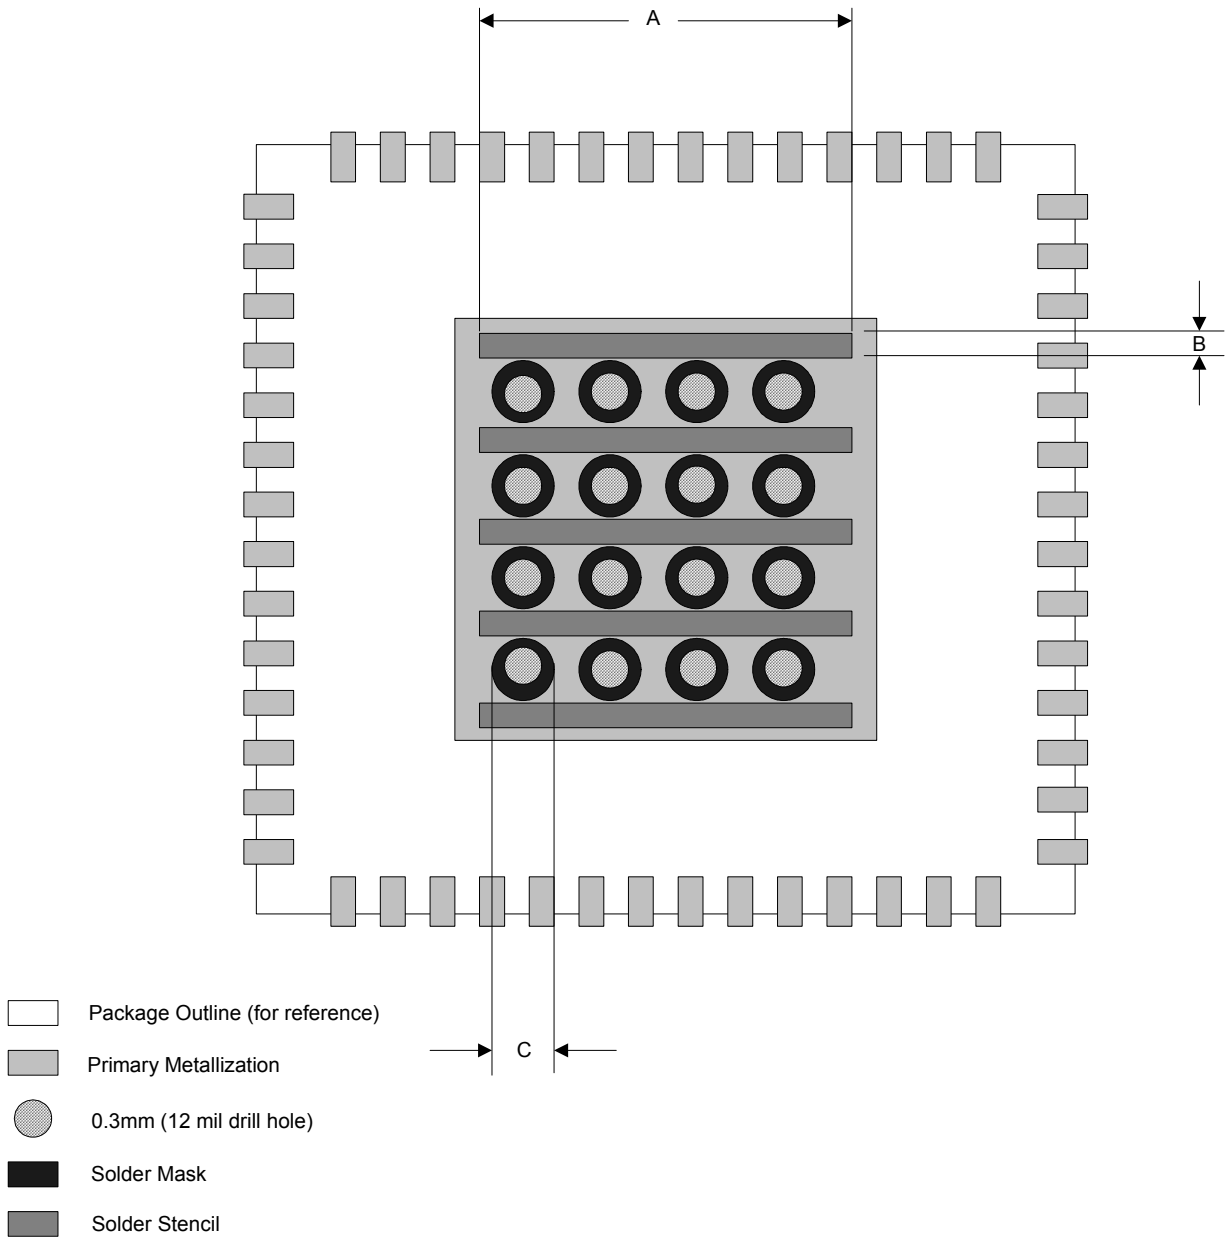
KSC-1000 Ground Paddle Solder Stencil and Solder Mask
